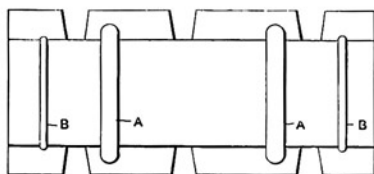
Mandrel for Babbitting Ring Oiling Bearings
